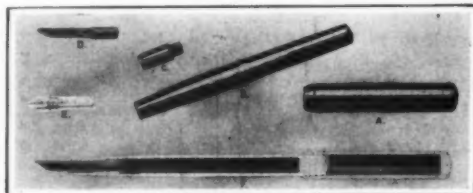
Component Parts of Waterman's Ideal Fountain Pen. A is the cap; B, the barrel; C, the Point Section; D, the "Spoon" Feed; E, the Pen Point; and F, a Sectional View of the Assembled Parts.
